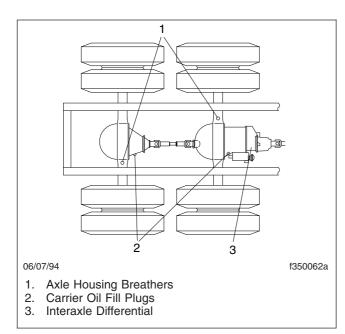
, Fill Hole Plug Locations, Meritor Axles
